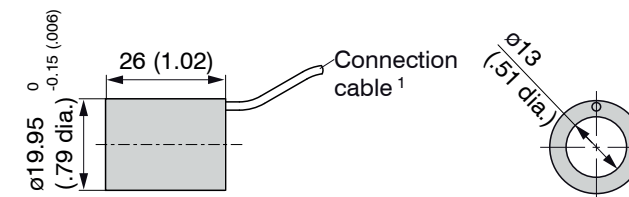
Dimensions of LDR-14-Z20, dimensions in mm, not to scale
